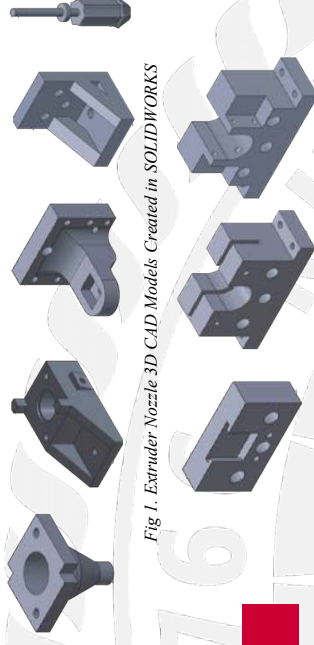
Extruder Nozzle 3D CAD Models Created in SOLIDWORKS
